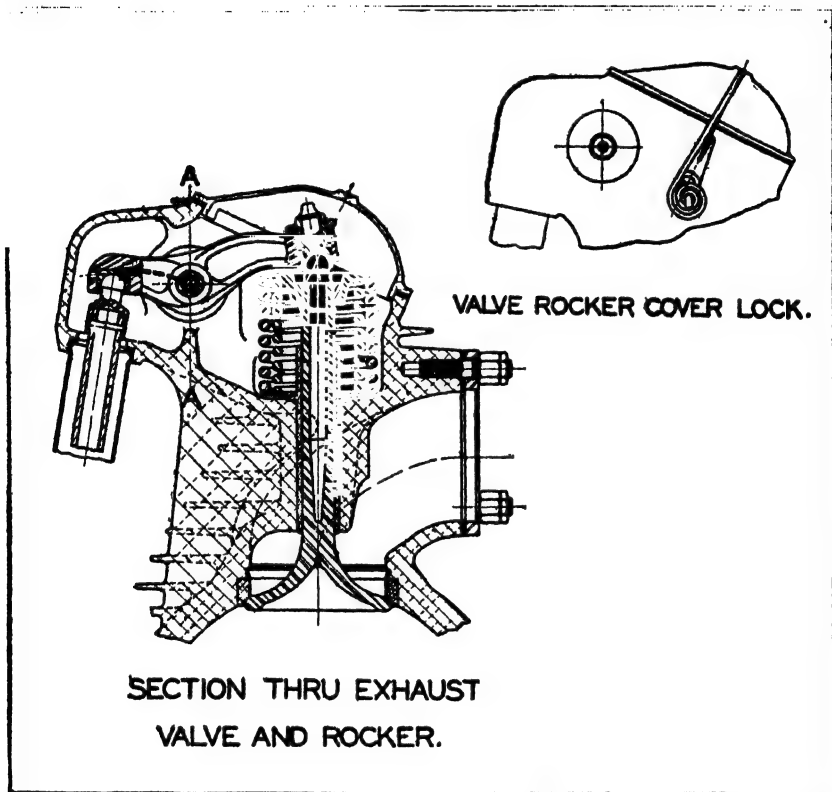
Section Through Exhaust Valve Rocker of Pratt & Whitney "Wasp" Engine.
